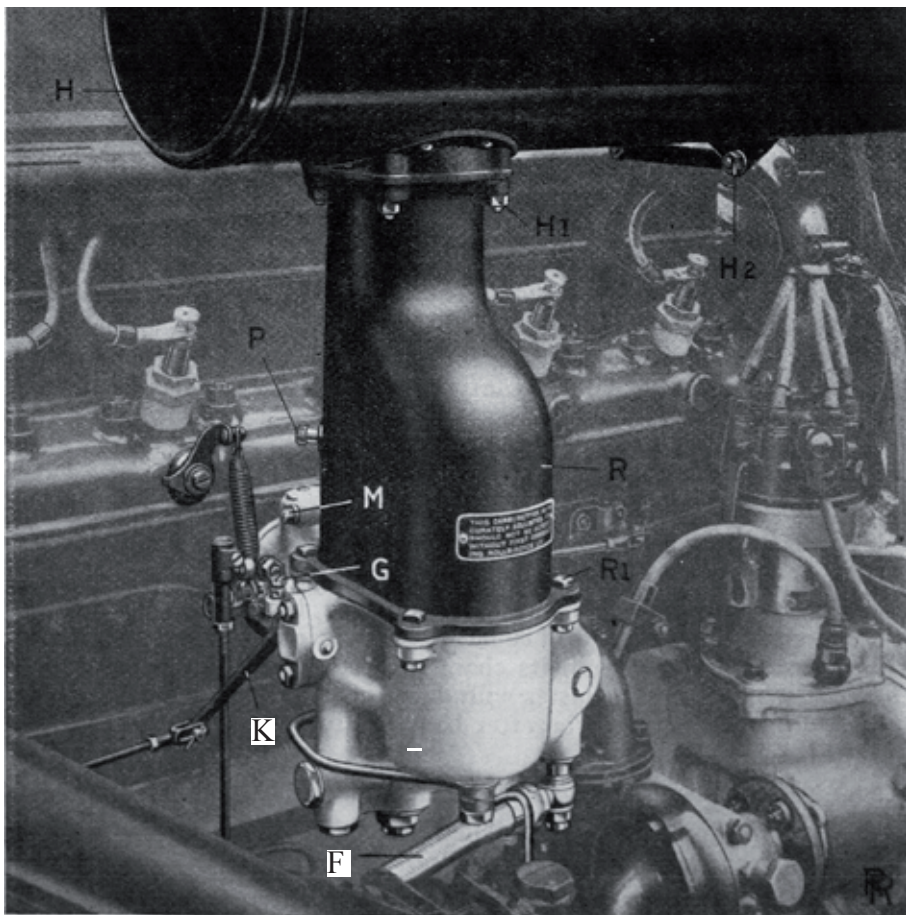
CARBURETTER IN POSITION ON ENGINE
